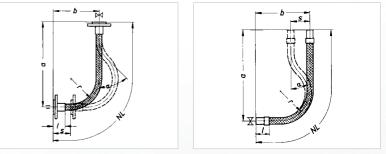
One-sided absorption of movements using a hose assembly in the 90° bend
